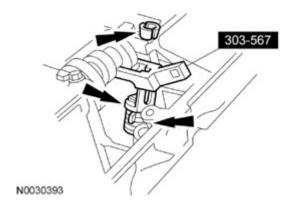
Removing/Installing Valve Spring Retainer Keys Courtesy of FORD MOTOR CO.
